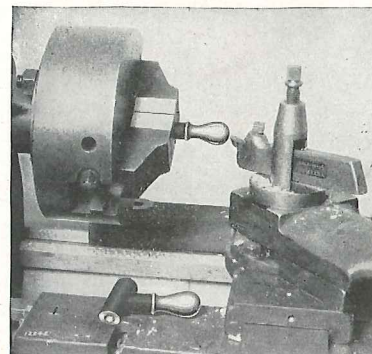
shows a two jaw lathe chuck fitted to the spindle of the lathe for holding irregular work.
